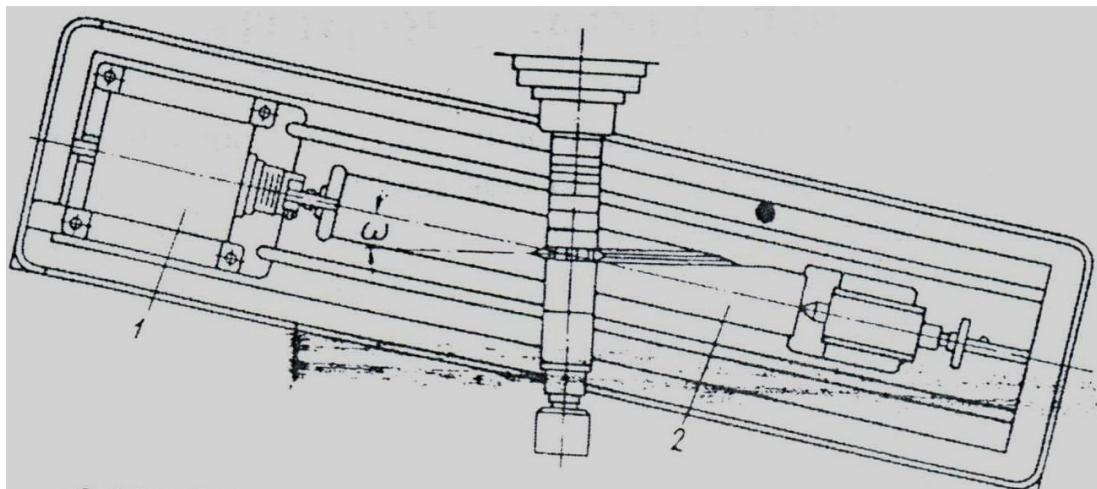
Milling of helical grooves; 1. Diving head; 2. Work piece
